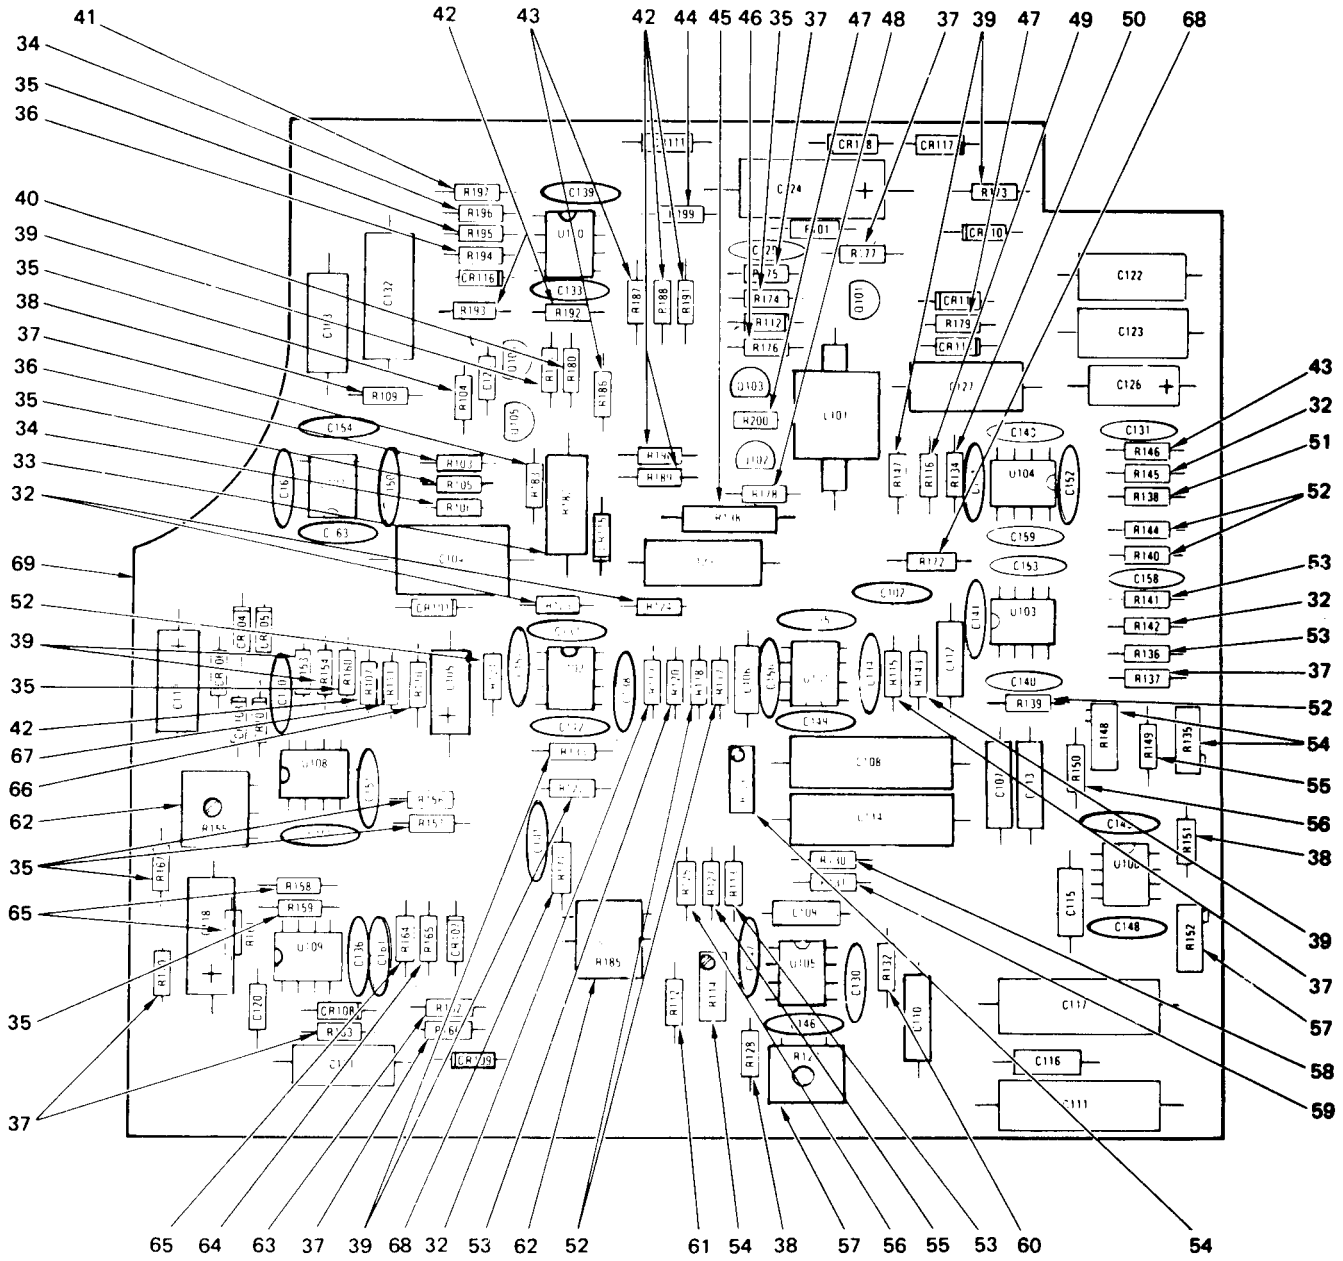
Balancer Circuit Card Assembly (Sheet 2 of 2)
